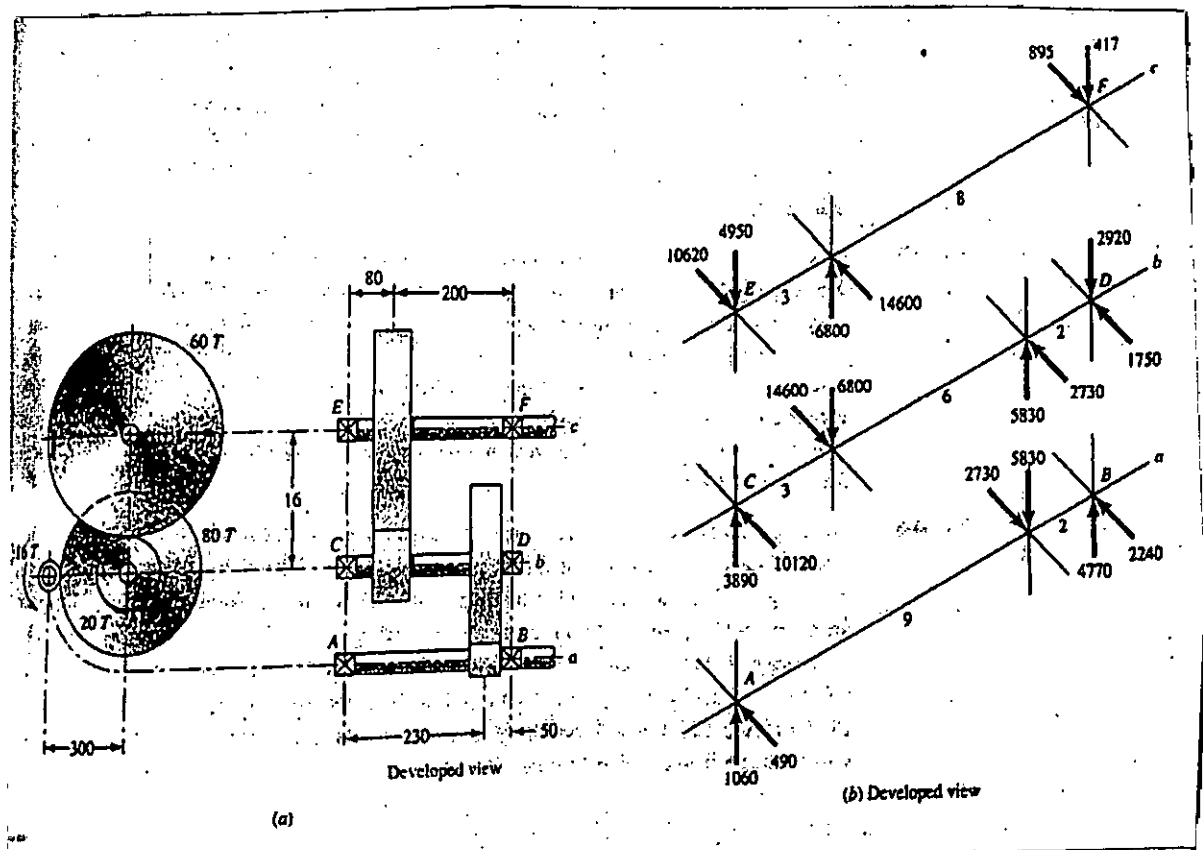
(a) Drive detail, (b) Force analysis on shafts. Forces in Newtons. Linear dimensions in millimeters.
